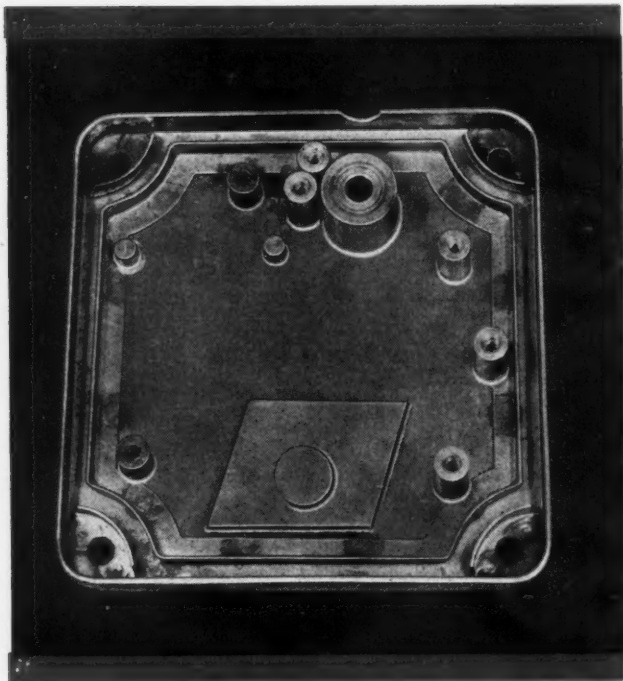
Switch Box before Brazing, Showing Arrangement of Pre-placed Pieces of Brazing Alloy
